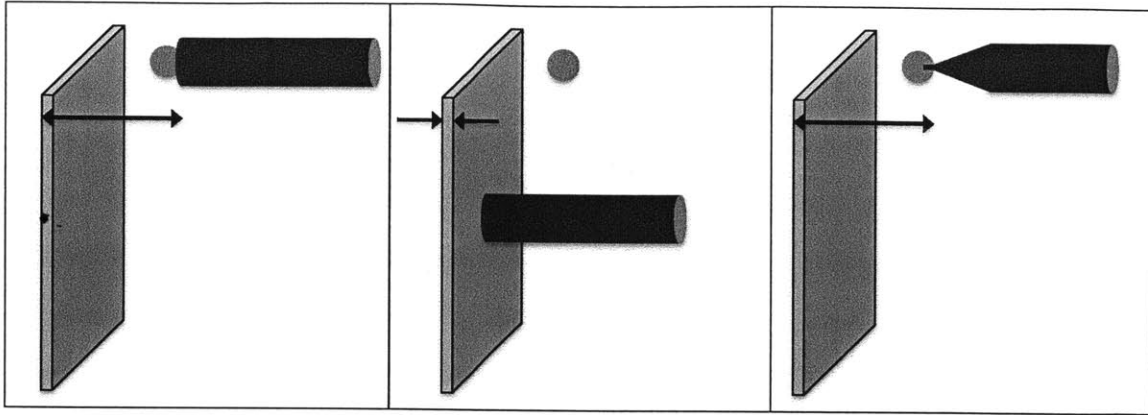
The mill uses a blank to determine the workpiece surface, and then uses a laser to determine the difference in length between the blank and the cutting tool
